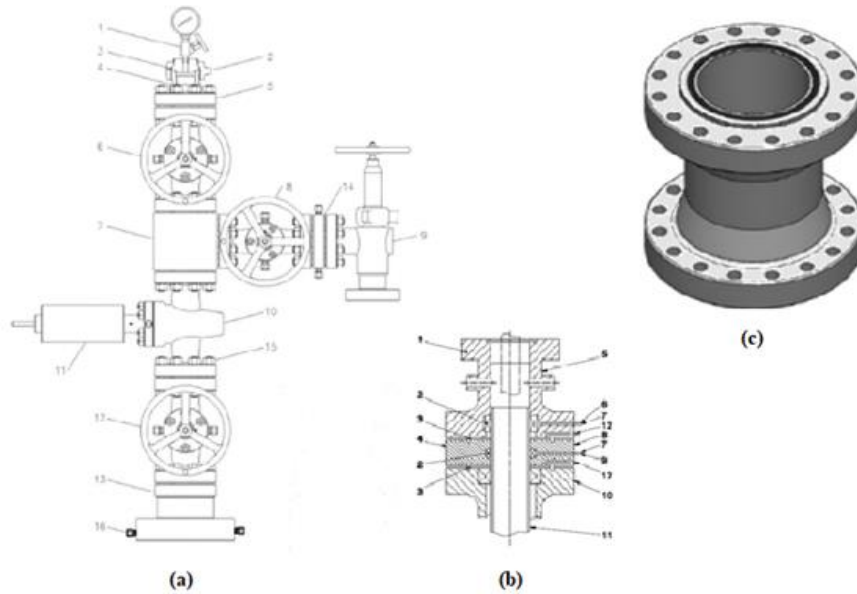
An Engineering drawing of a Christmas-tree Oil Wellhead, (a) Oil Well Head, (b) Cross Section of 5000-psi wellhead pressure rating [12], (c) 3D Model of Spacer Spool [14]
